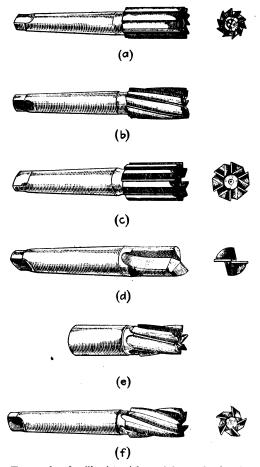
Types of end mills, (a) with straight teeth, (b) with spiral teeth; (c) with "center cut," the end teeth are backed off on the inner ends (recess); (d) two lipped slotting end mill; (e) straight shank end mill; (f) high speed type, has coarse teeth undercut to give rake and has also a steeper spiral than b or e.
